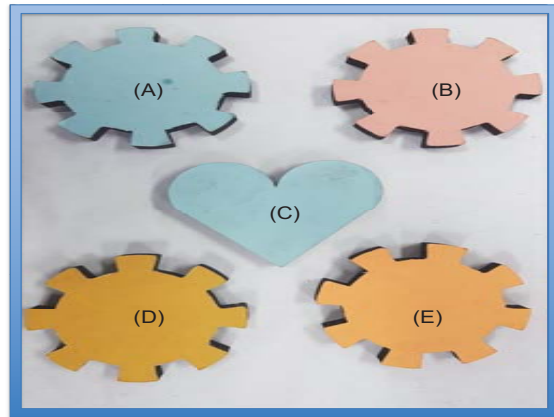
Example of shapes to be recognized: (A) Blue gear, (B) Pink gear, (C) Blue heart, (D) Yellow gear, and (E) Gold gear
